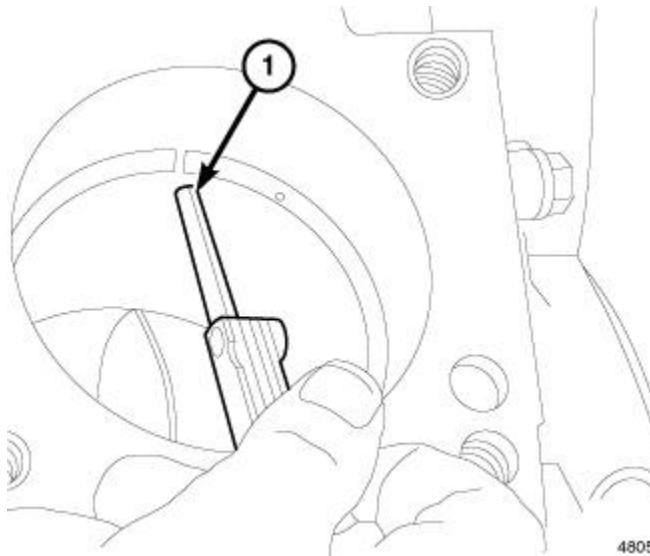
Using Feeler Gauge To Check Ring End Gap
